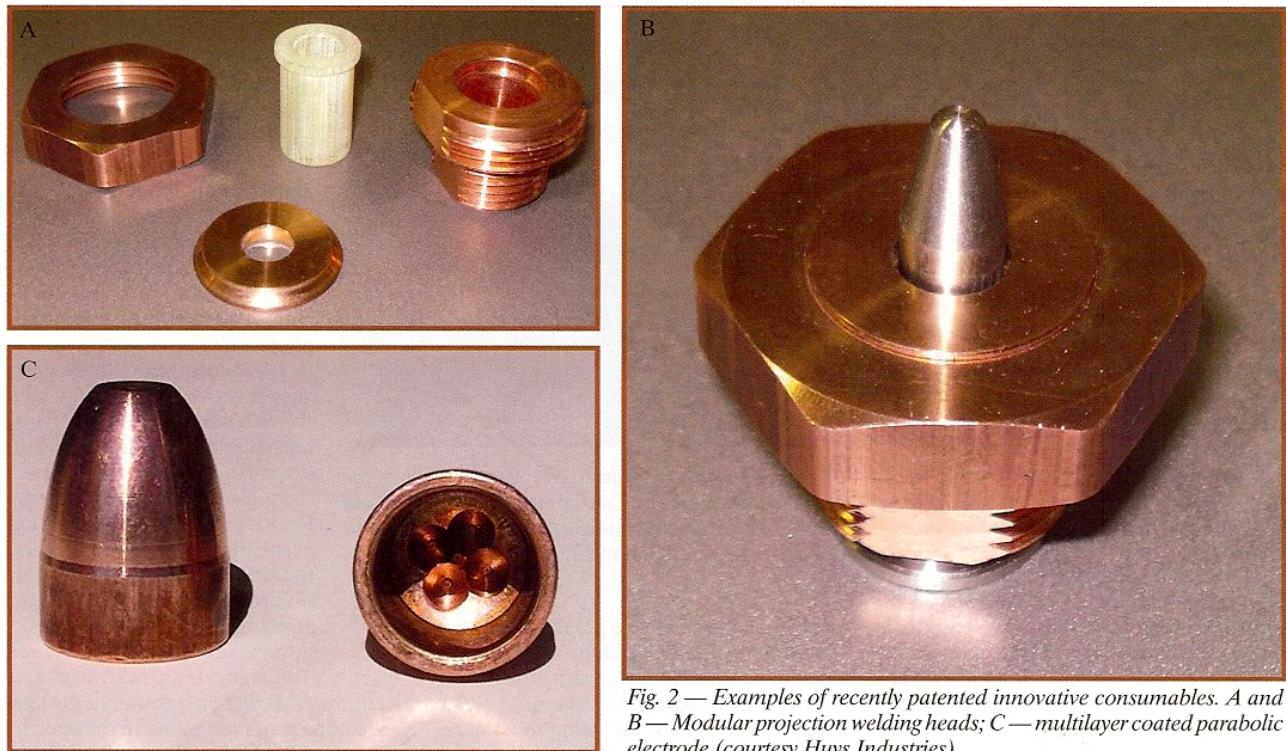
Examples of recently patented innovative consumables. A and B—Modular projection welding heads; C—multilayer coated parabolic electrode (courtesy Huys Industries).
